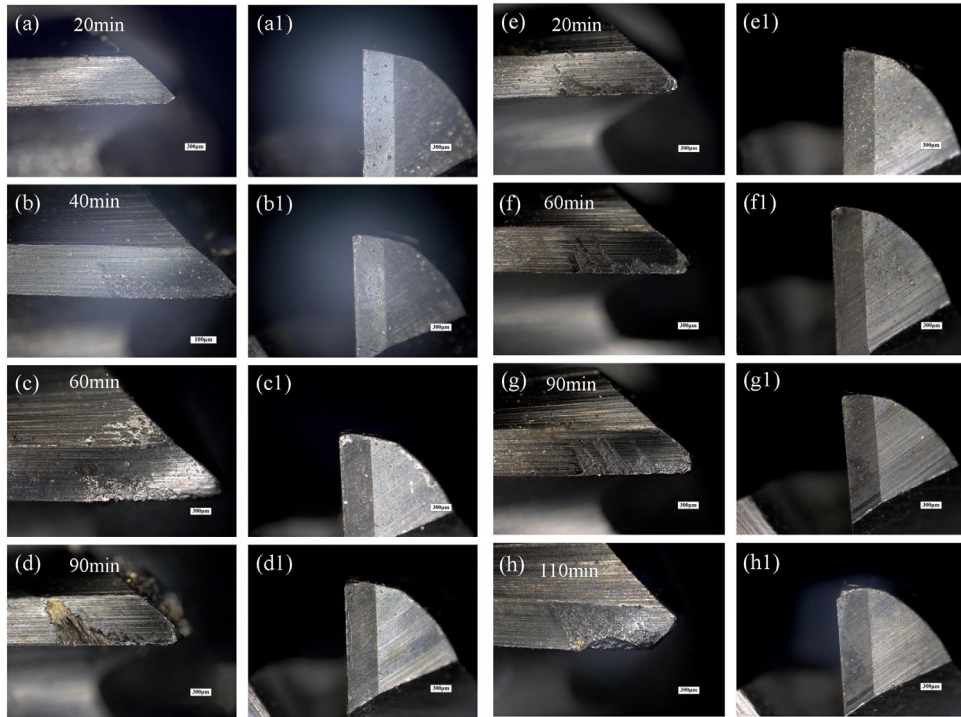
Morphology of Wear on (a,b,c,d) Side and (e,f,g,h) Bottom Cutting Edges of As-Deposited Coated Tools During Hardened Steel Cutting; (a1,b1,c1,d1) Side and (e1,f1,g1,h1) Bottom Cutting Edge Wear Morphology of Annealed Coated Tools
